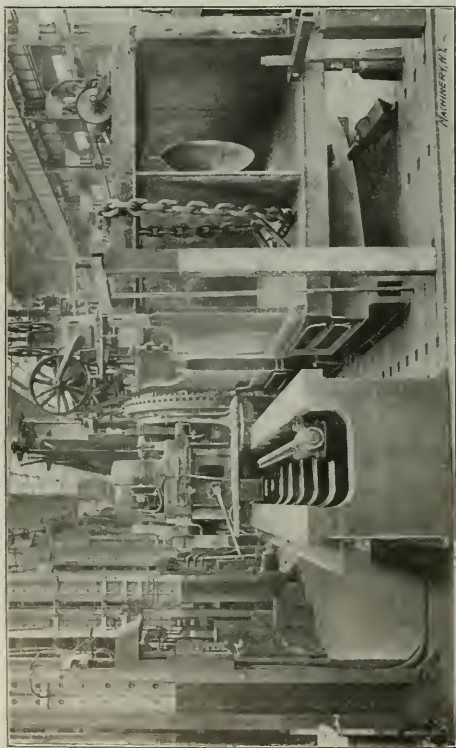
Rotary Planer with Motor Mounted on the Carriage. Surfacing the Joint on a Heavy Turbine Casting.
